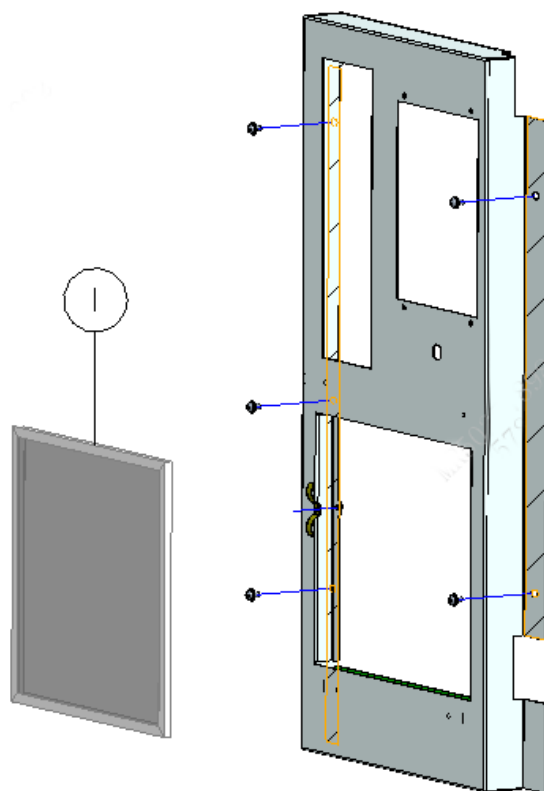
Exploded view of right front board assembly (Caretium ISE configured)
